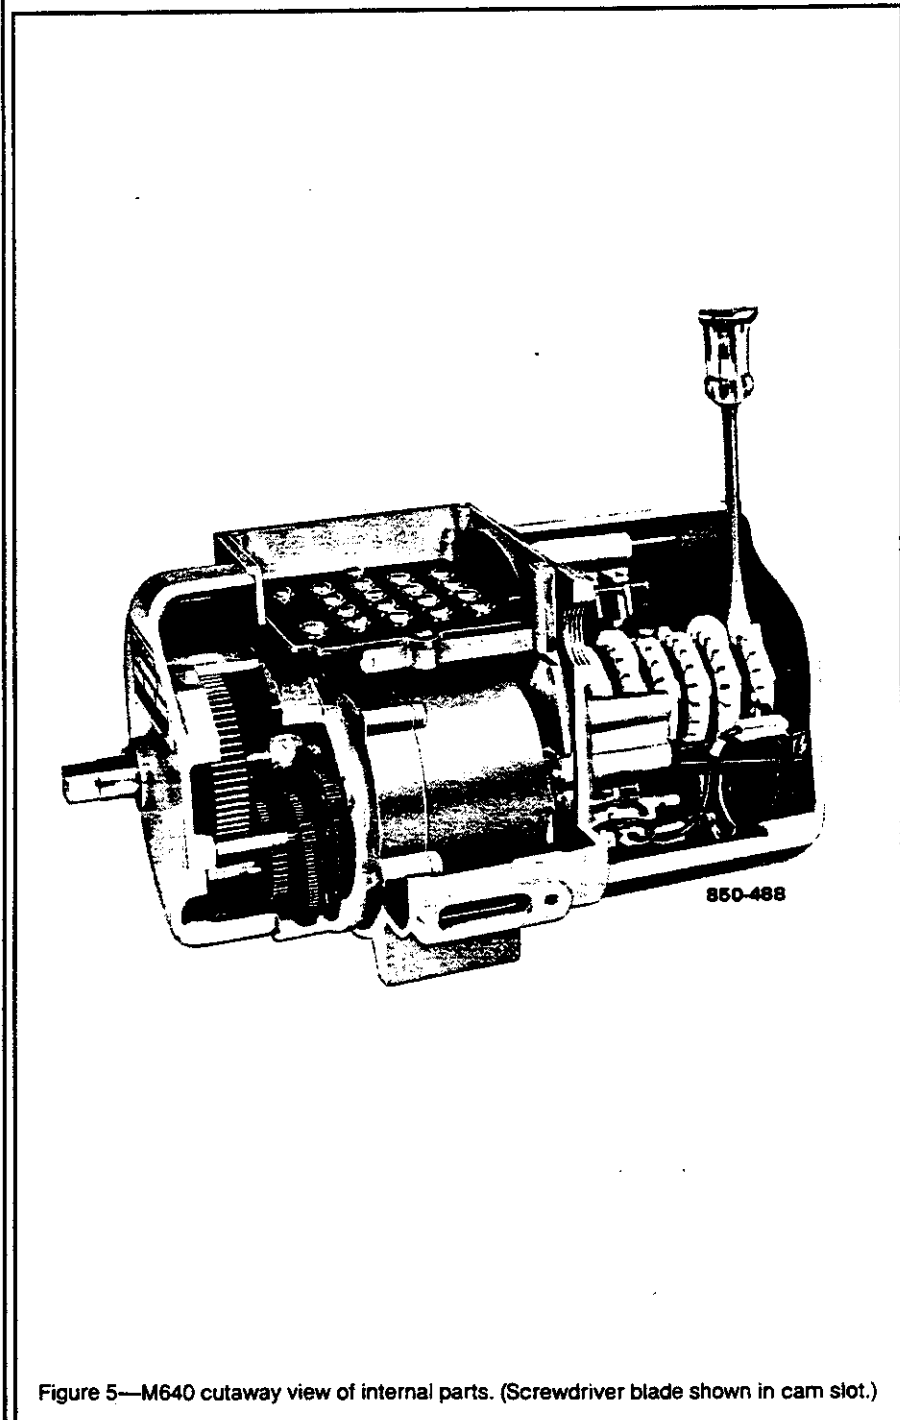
M640 cutaway view of internal parts. (Screwdriver blade shown in cam slot.)
